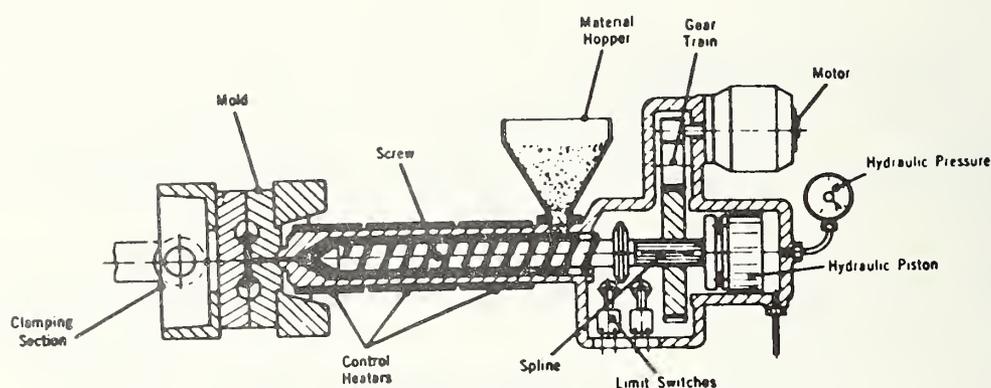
IN-LINE RECIPROCATING SCREW UNIT
